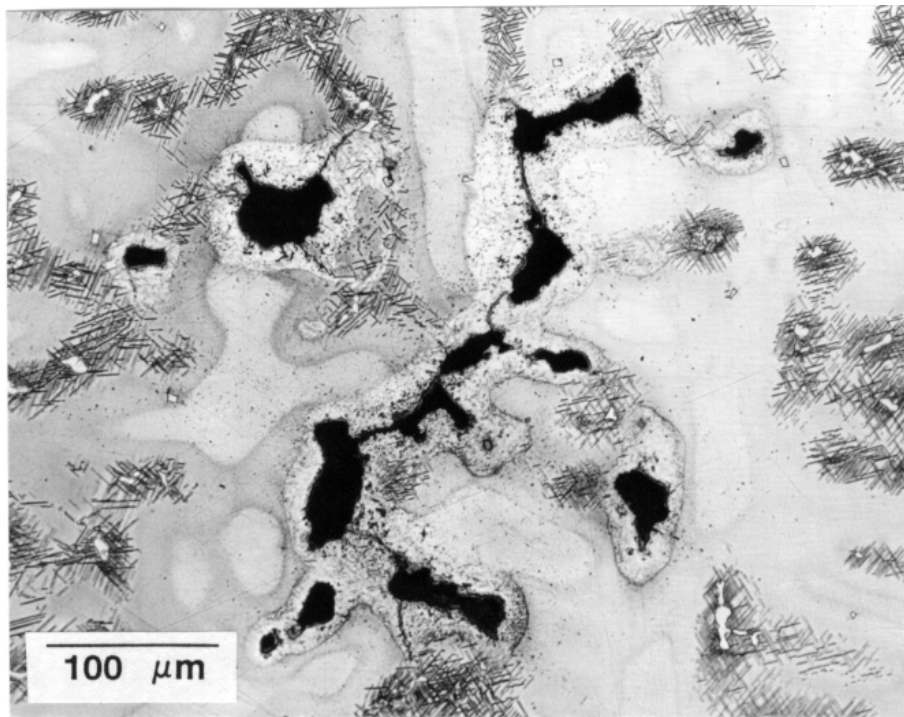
DEFECT TYPES OBSERVED IN RETIRED COMPRESSOR REAR FRAMES:
